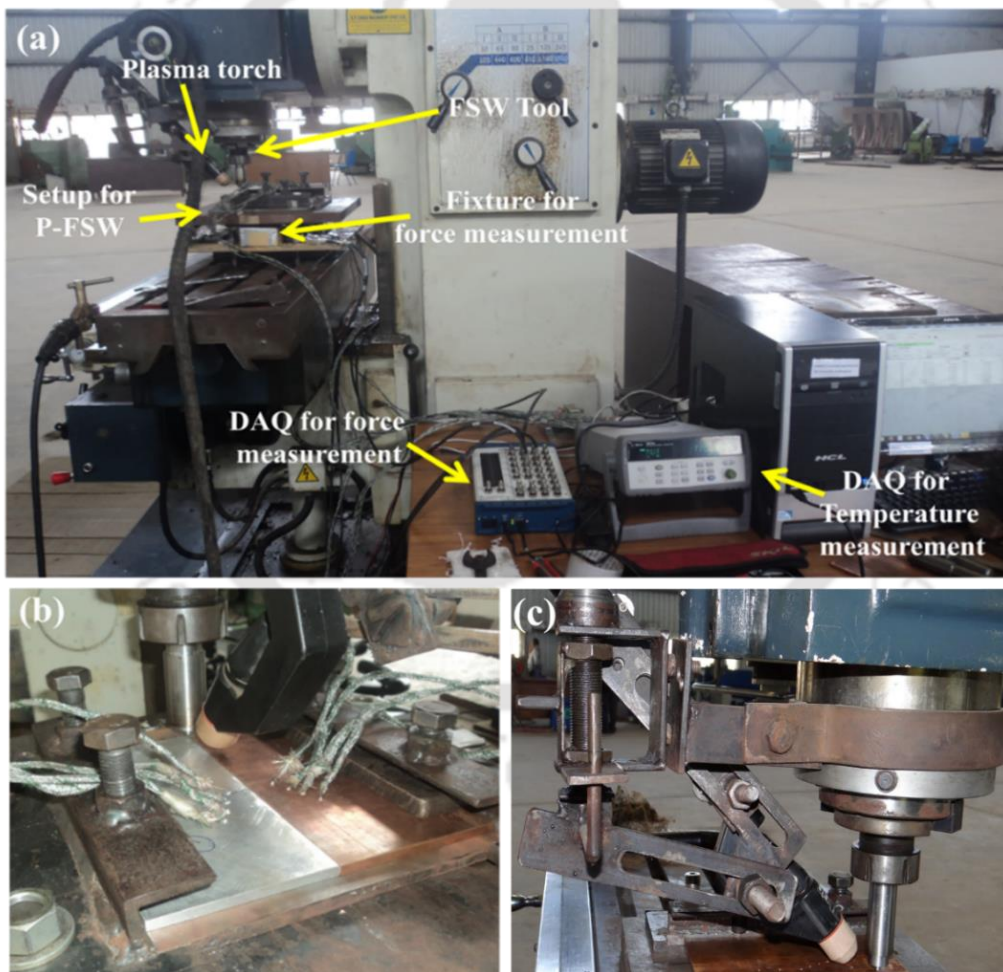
(a) Experimental setup for P-FSW; (b) Front view of P-FSW setup; (c) Side view of P-FSW setup.
